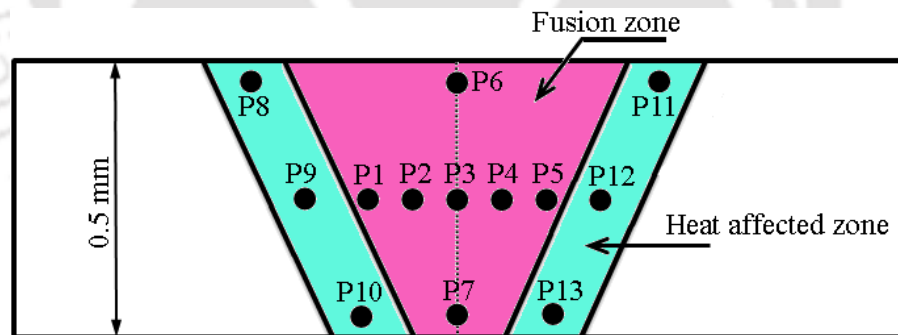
Scheme for micro-hardness measurement of welded samples.
